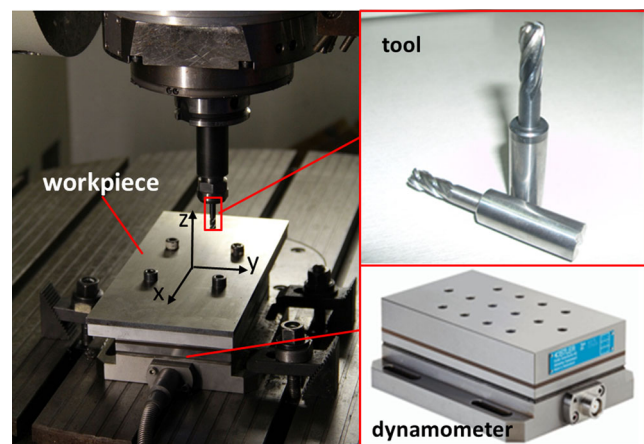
Experimental setups and helical milling cutters used in the experiment
